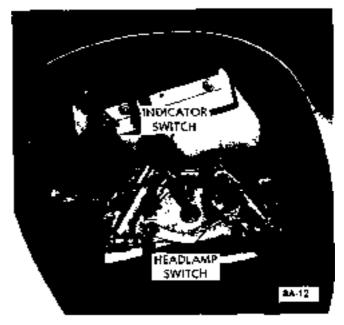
A-1 2 Headlamp and Headlamp Indicator Switches
